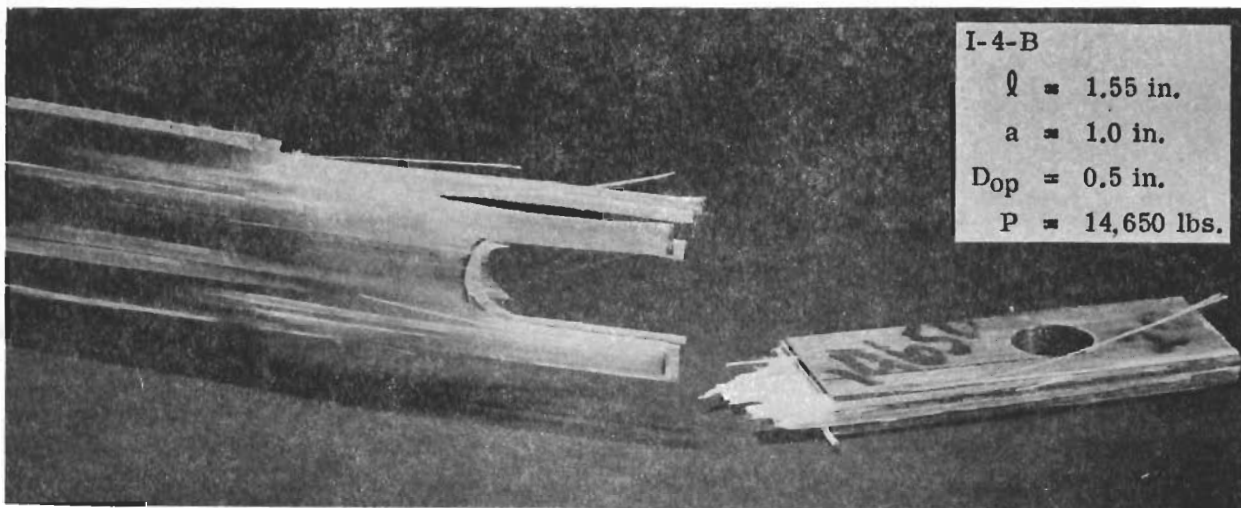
Flat Plate Specimens-Failure of BR-1009-49 Adhesive Joint
